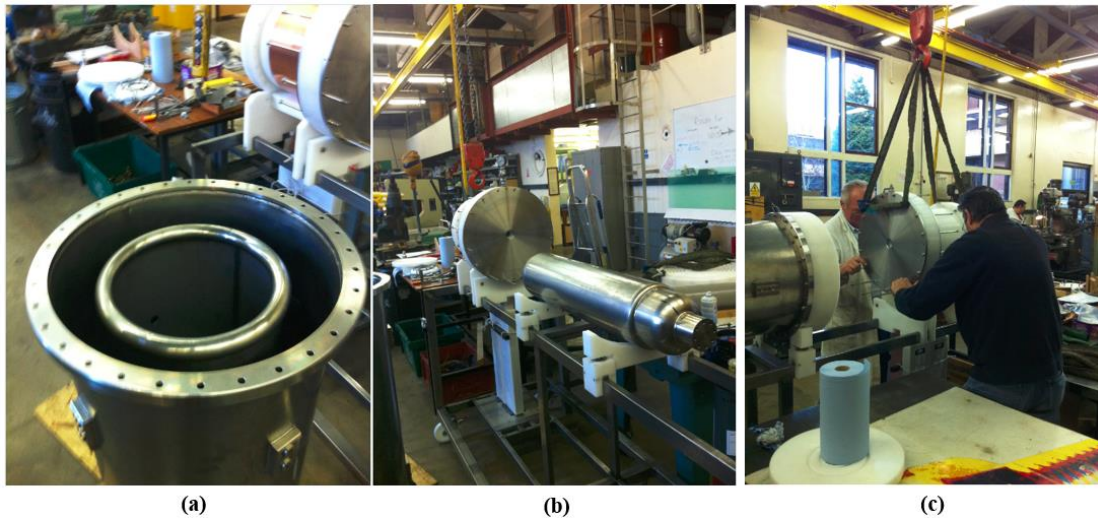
Aspects from manufacturing and assembly. (a) outer and intermediate electrodes partially assembled. (b) inner electrode ready for mounting. (c) attaching the Tesla to the Blumlein PFL.
